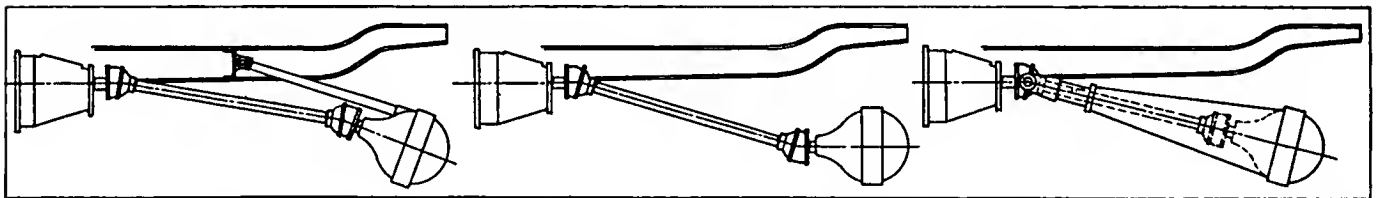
Left—Layout for propeller shaft recommended by C. W. Spicer to divide angularity evenly between the two joints. Center—Layout obtained with Hotchkiss drive which bends both joints equally. Right—Layout with long torque rod which renders rear joint inoperative
